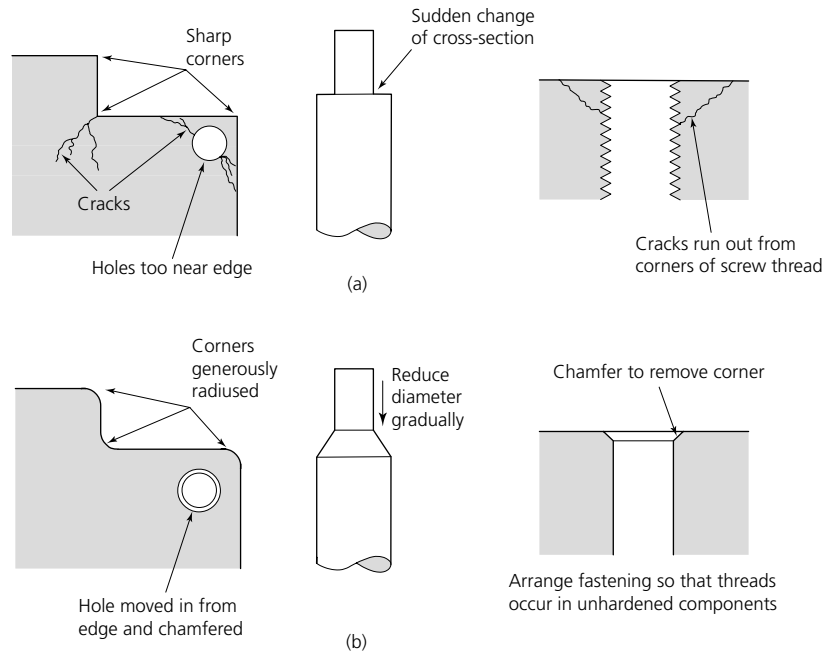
Causes of cracking: (a) incorrect engineering that promotes cracking; (b) correct engineering to reduce cracking
